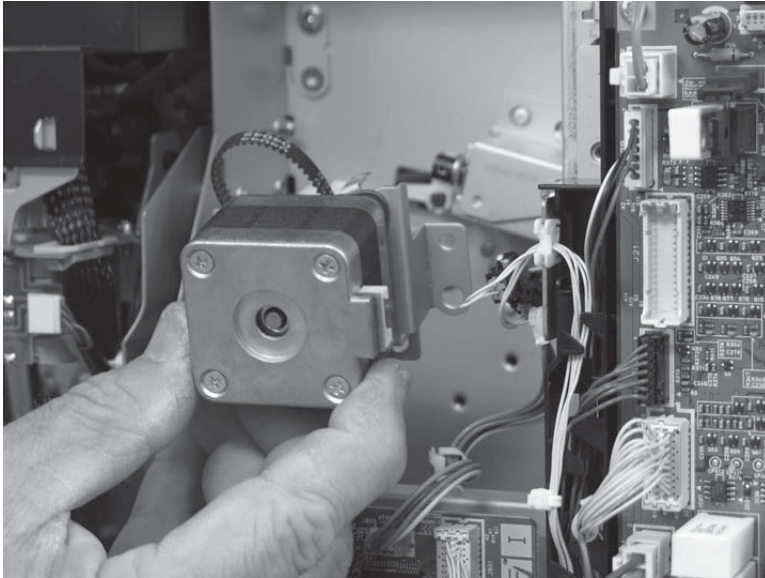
Remove the saddle motor assembly (SS and BM; 2 of 3)
